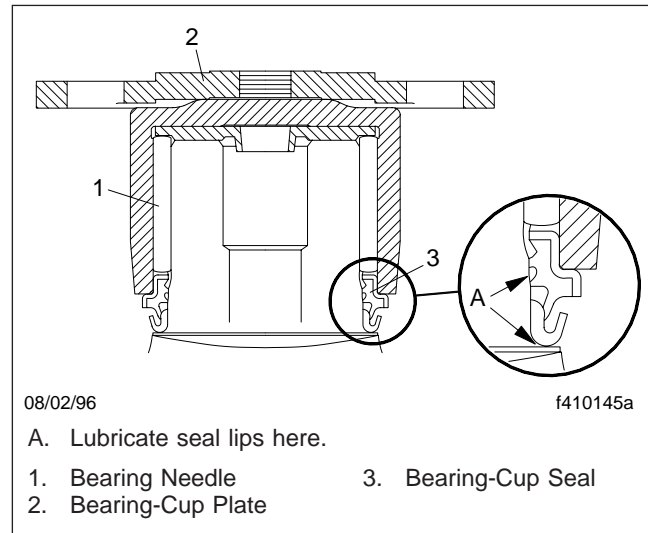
, Sectional View of a Full-Round Yoke U-Joint Bearing Cup
